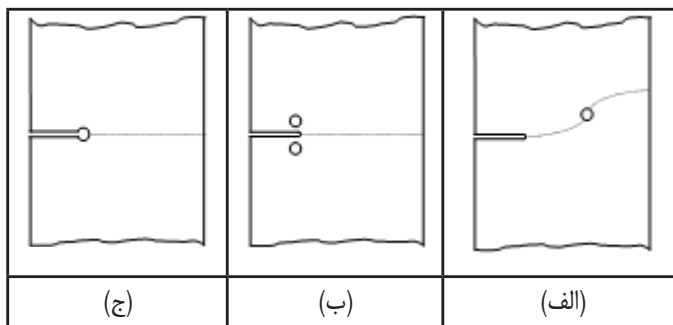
Types of stop hole drilling (a) crack deflecting hole (b) crack flank holes (c) crack tip hole
